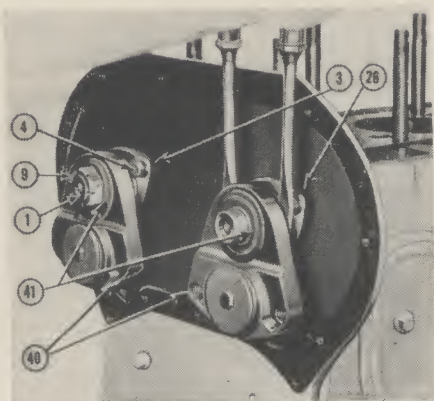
A—A GM engine showing method of removing balance weight assemblies. Weights as illustrated are for a 6 cylinder engine. One-piece weights are used on all 3 and 4 cylinder engines.
